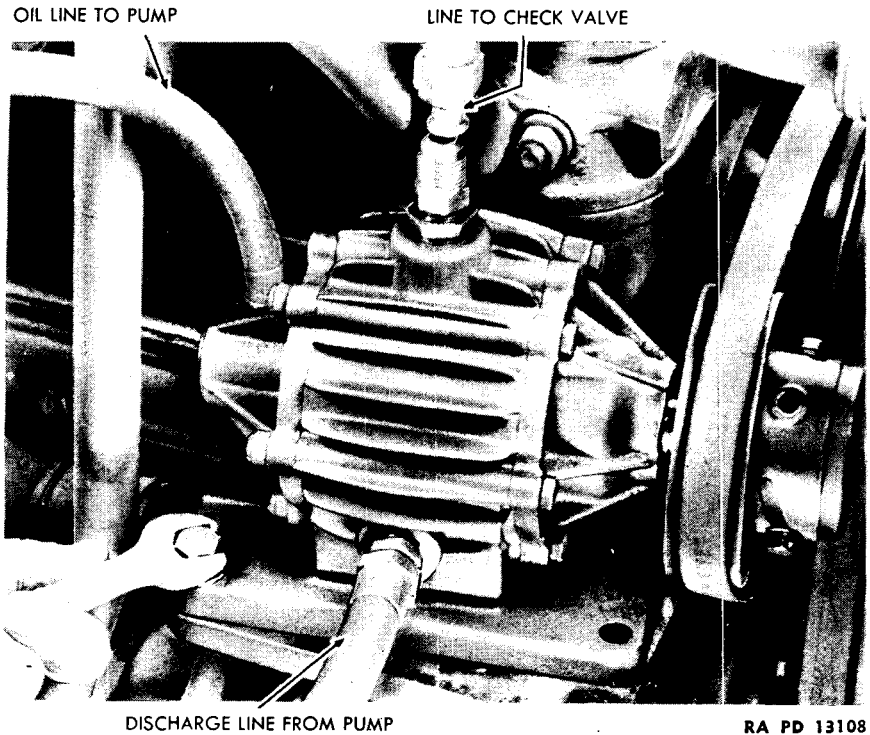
Removal of Vacuum Pump - (Hercules Diesel)
